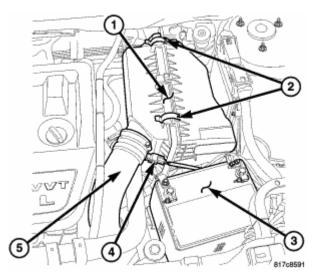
AIR CLEANER HOUSING Courtesy of CHRYSLER LLC
